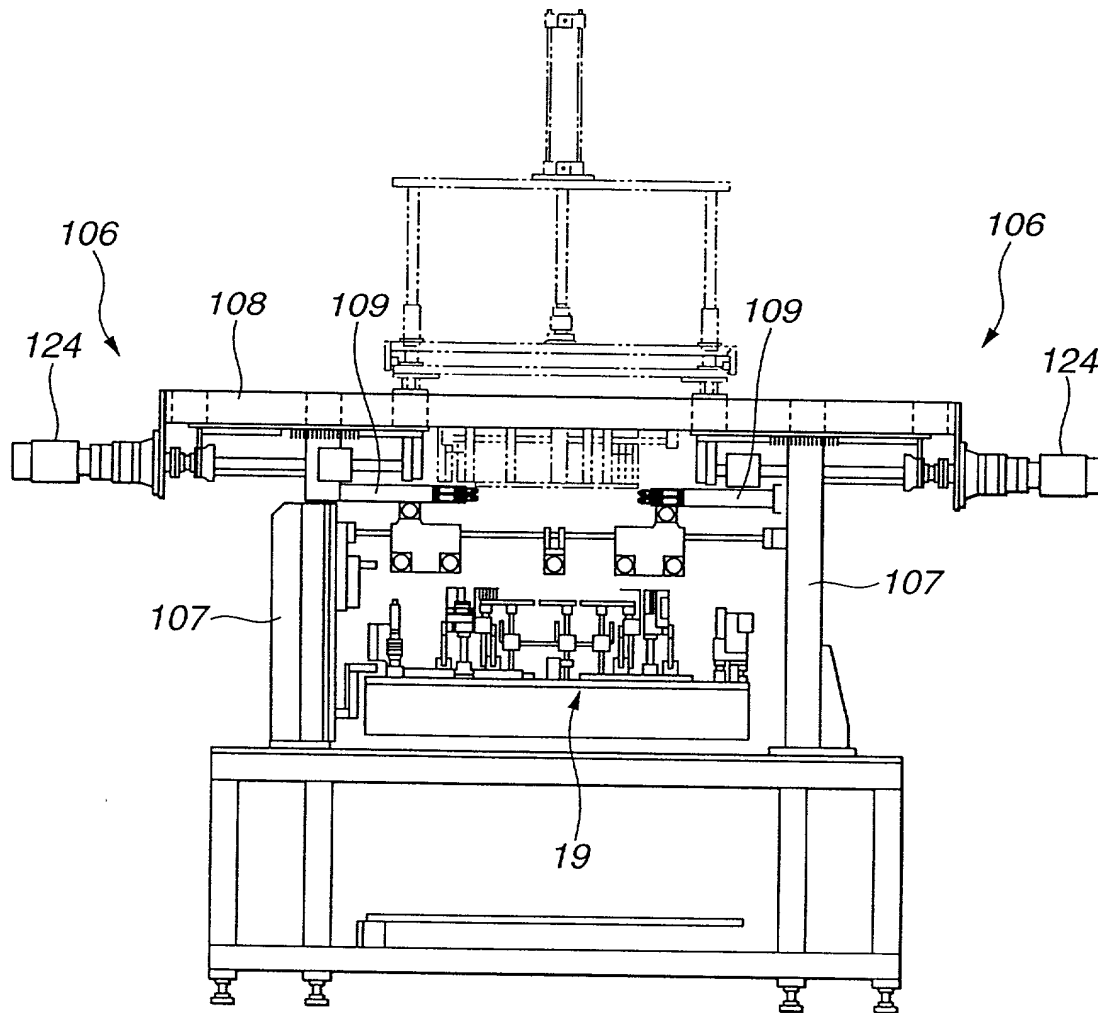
is a cross-sectional view of a heat exchanger manufacturing machine. The machine includes a base 19, a central processing unit 107, and a horizontal assembly 108. The horizontal assembly 108 includes two main horizontal shafts 106, each terminating in a flange 124. Between these shafts are two vertical components 109. The entire assembly is supported by a frame 107. A vertical rod with a handle is positioned at the top center. The drawing uses solid lines for visible parts and dashed lines for hidden internal components.
